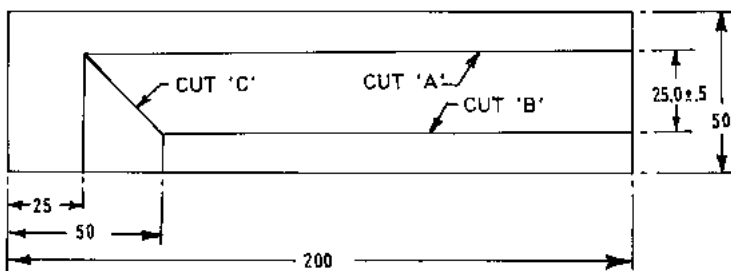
Dimensions and cutting line of test piece (IS 7016 Part V). Cut A extends from one end of the test piece to within 25 mm of the other end. Cut B extends to within 50 mm of that end. Cut C is a diagonal cut joining the ends of cut A and B (all dimensions in mm). (Adapted with permission from Bureau of Indian Standards.)
